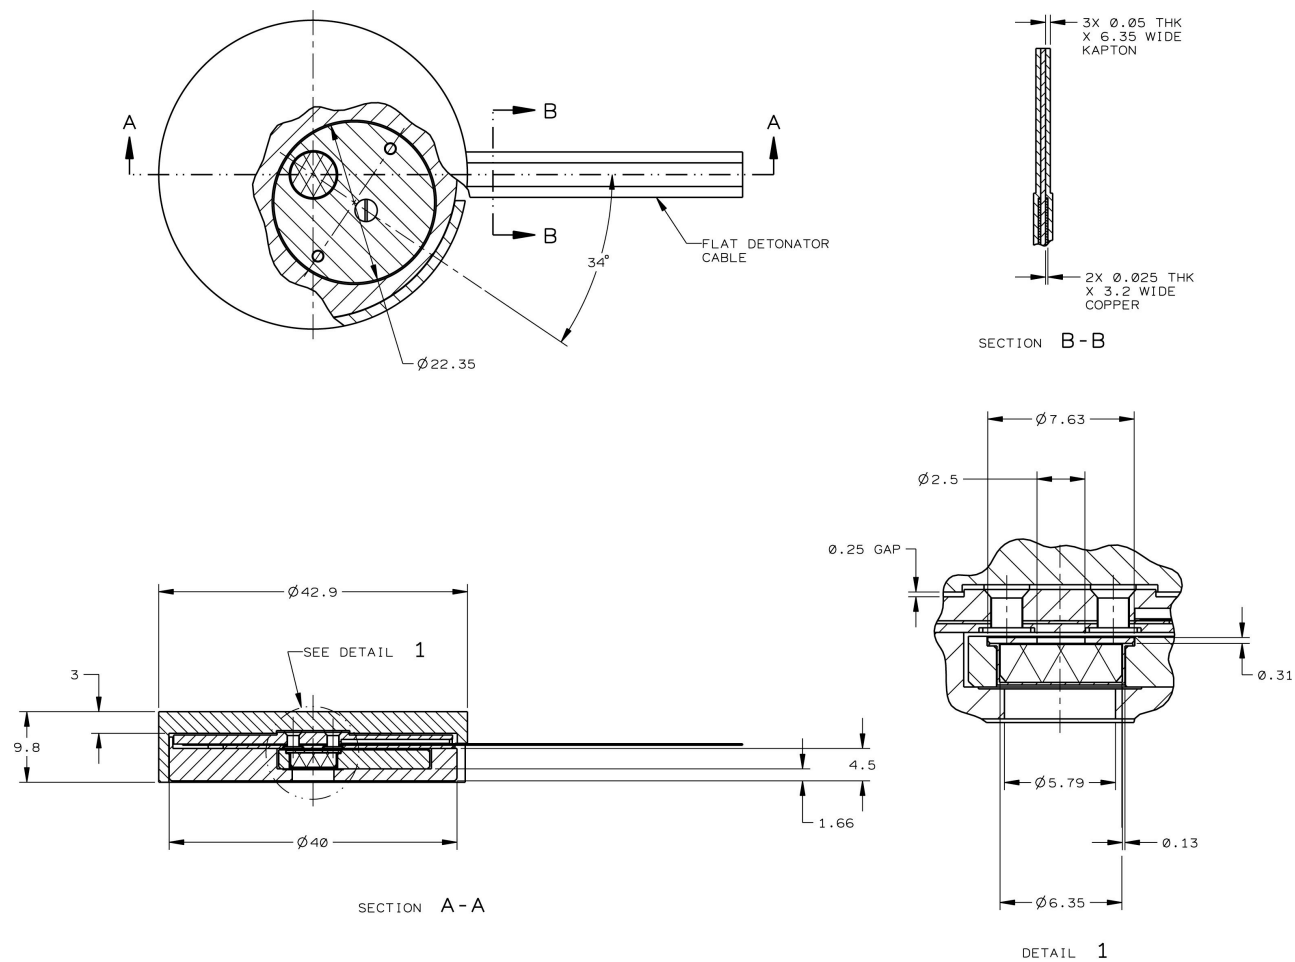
2021E PT3 & PT4 Shadowplate: Full Assembly Top View and Cross Section
